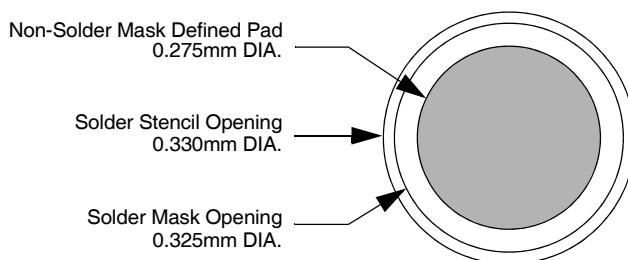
Recommended Non-Solder Mask Defined Pad Illustration
